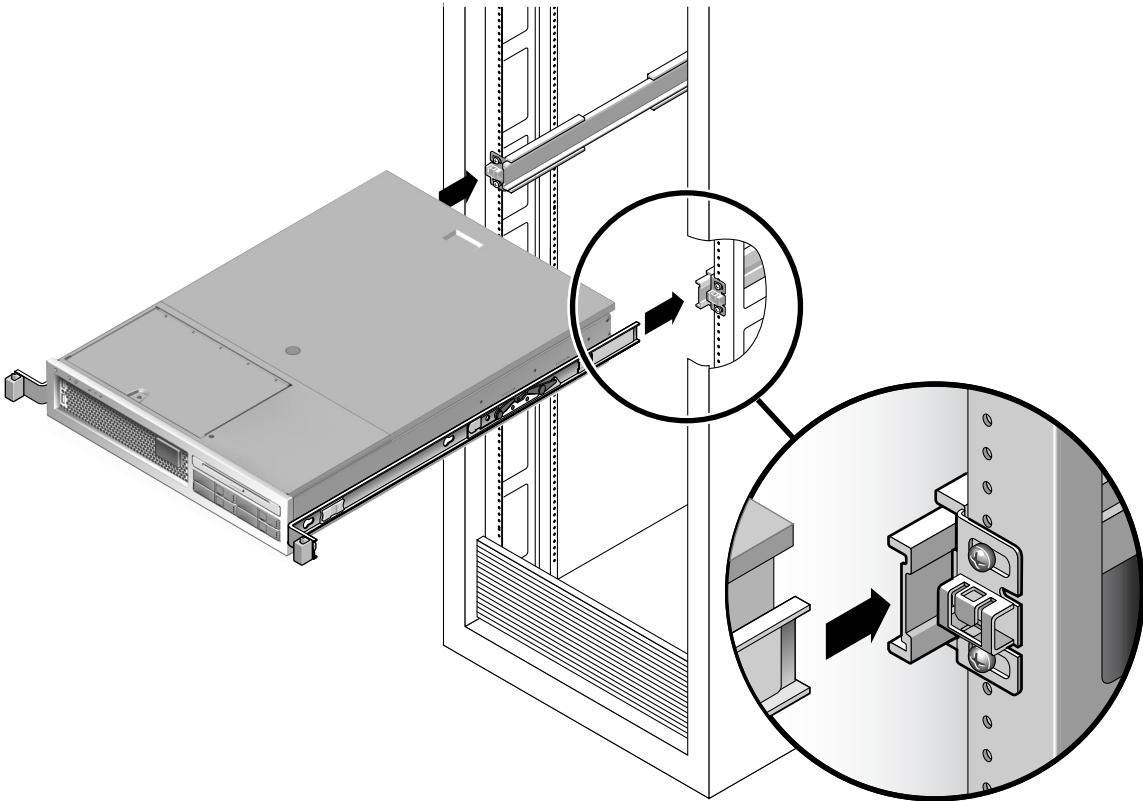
Mounting the Chassis on the Slide Rails
